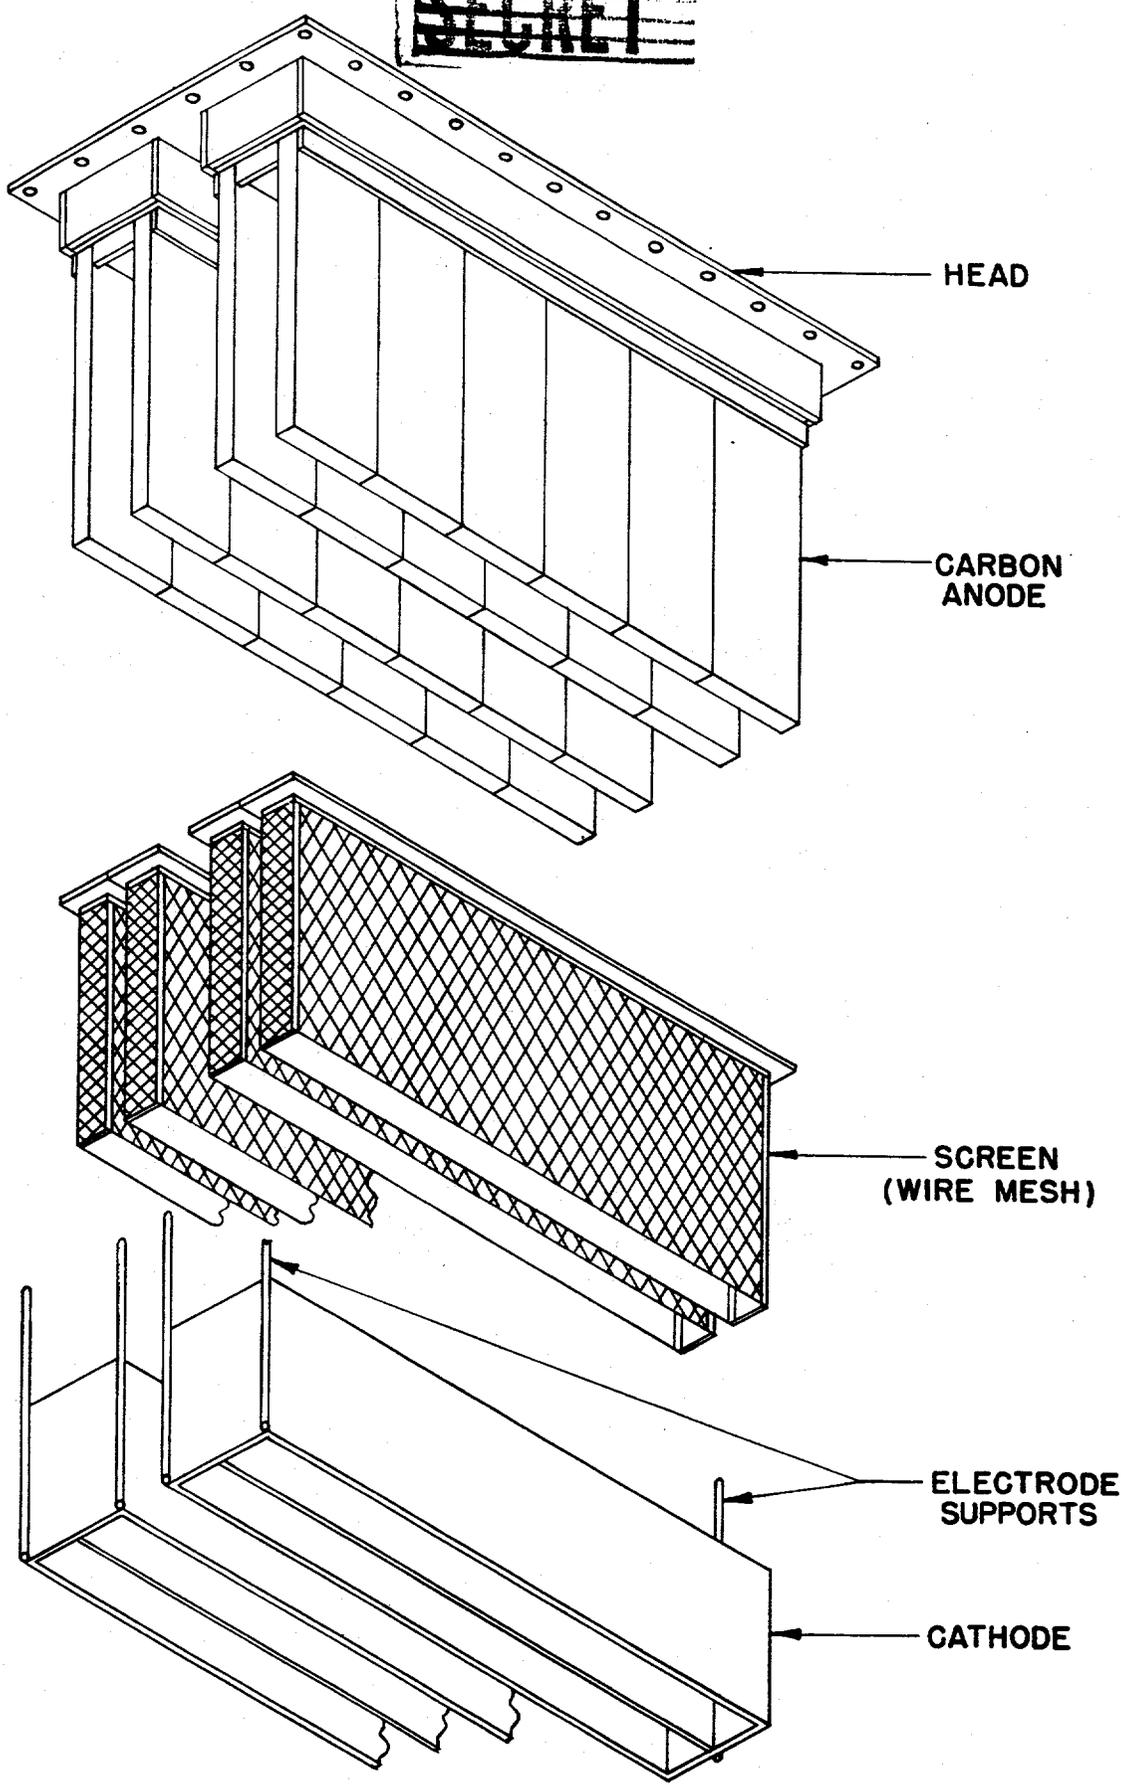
FLUORINE CELL HEAD ASSEMBLY
